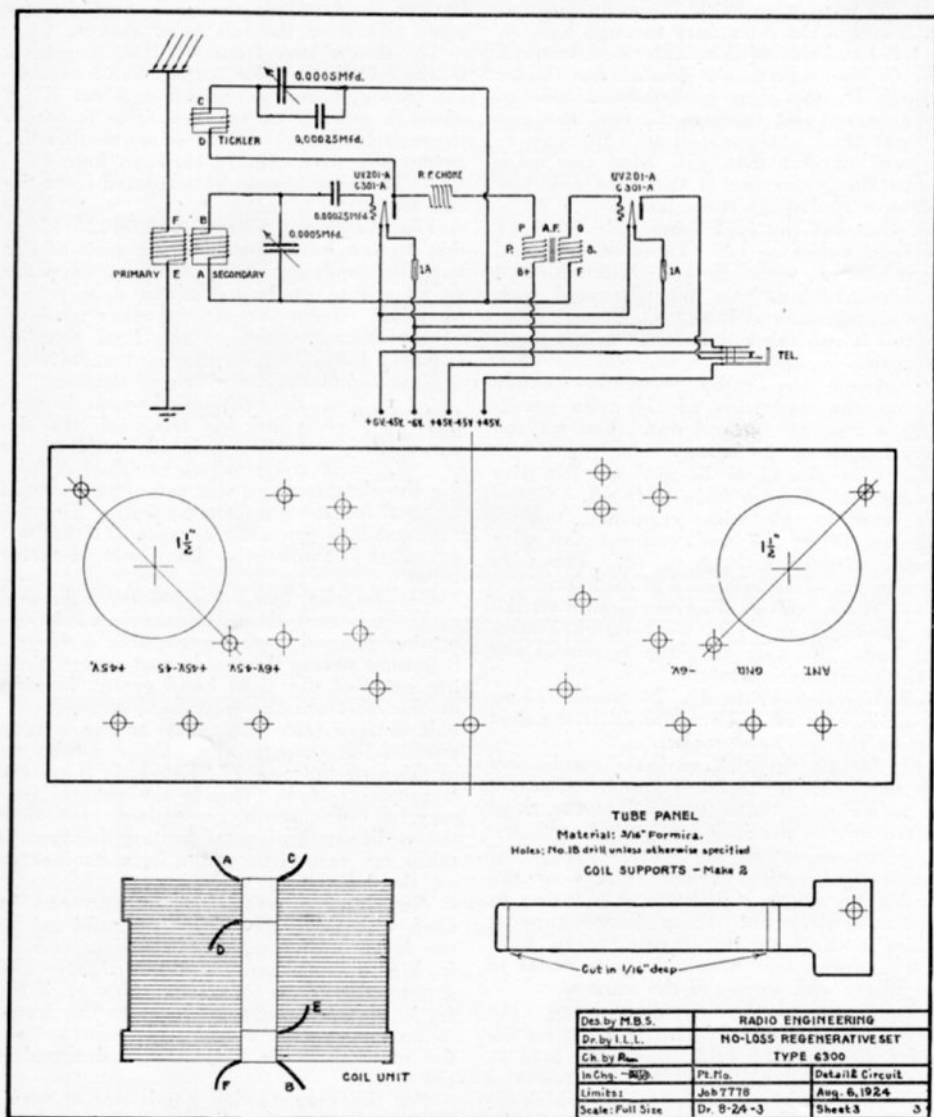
One-half scale drawings of the tube panel, coil unit, and coil supports, as well as a schematic wiring diagram illustrating the circuit system
